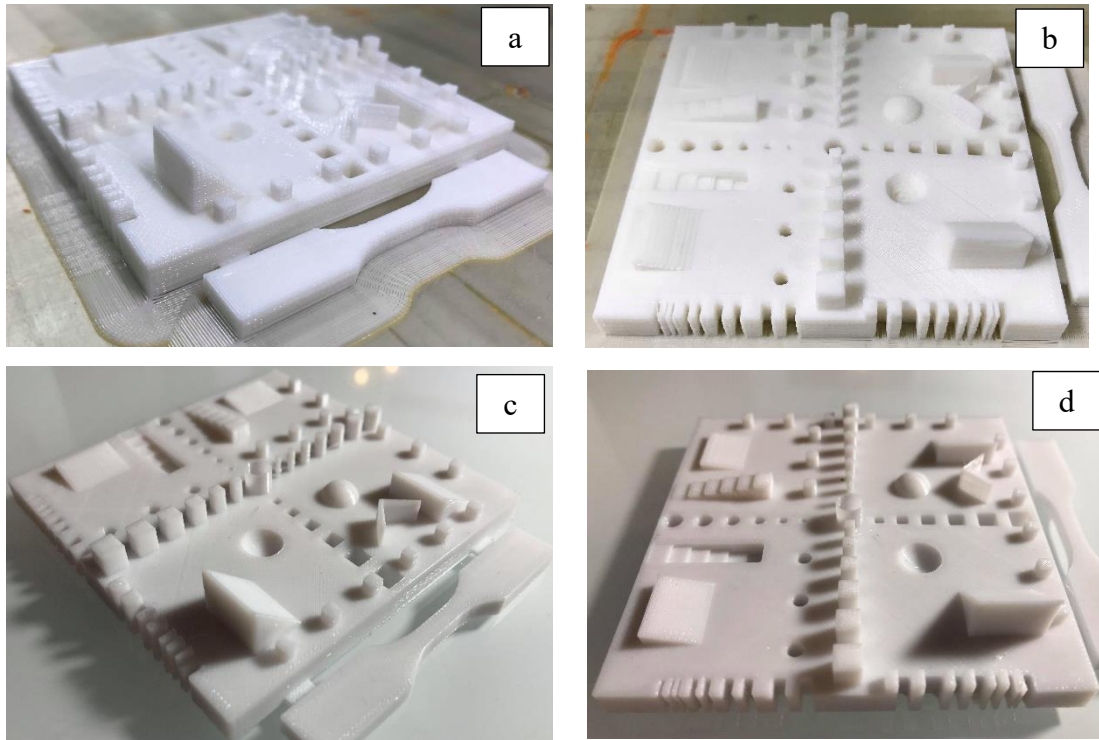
3D printed ranking model used for printer comparison (a) isotropic view of printed part using the modular desktop 3D printer (b) front view of printed part using the modular desktop 3D printer (c) ranking model printed with Fortus 400mc (d) front view of printed part using Fortus 400mc
